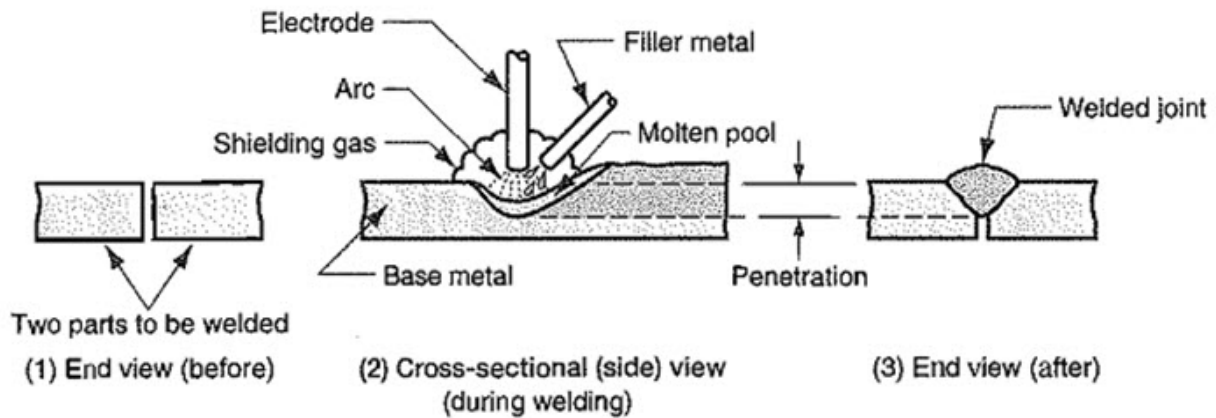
Basics of arc welding: (1) before the weld; (2) during the weld (the base metal is melted and filler metal is added to the molten pool); and (3) the completed weldment. There are many variations of the arc-welding process.
